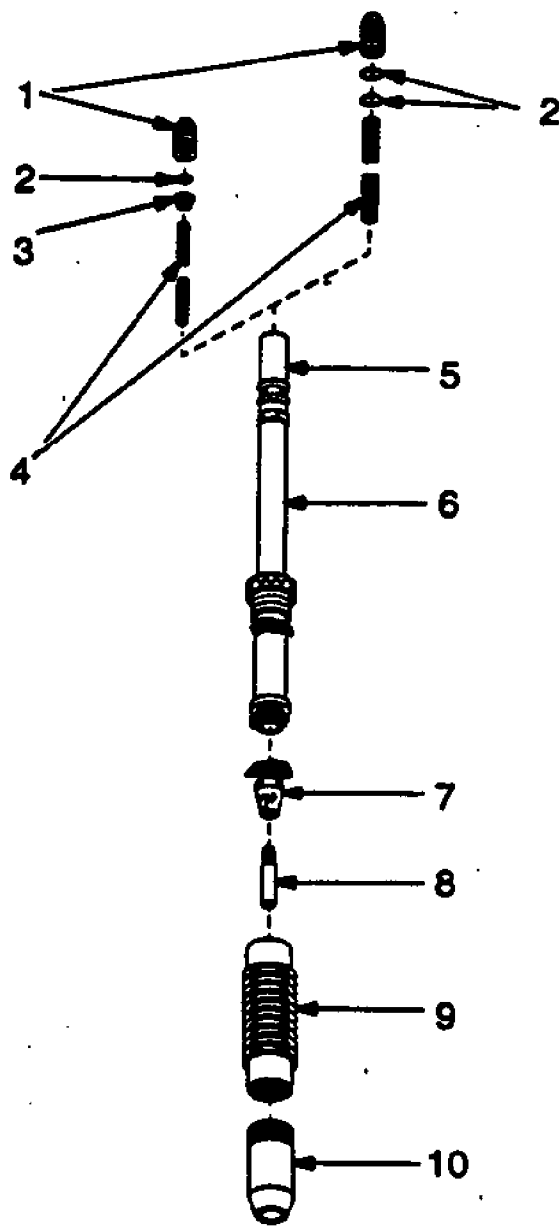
Waterproof of the Contact Tip and Contact Tip Adapter
